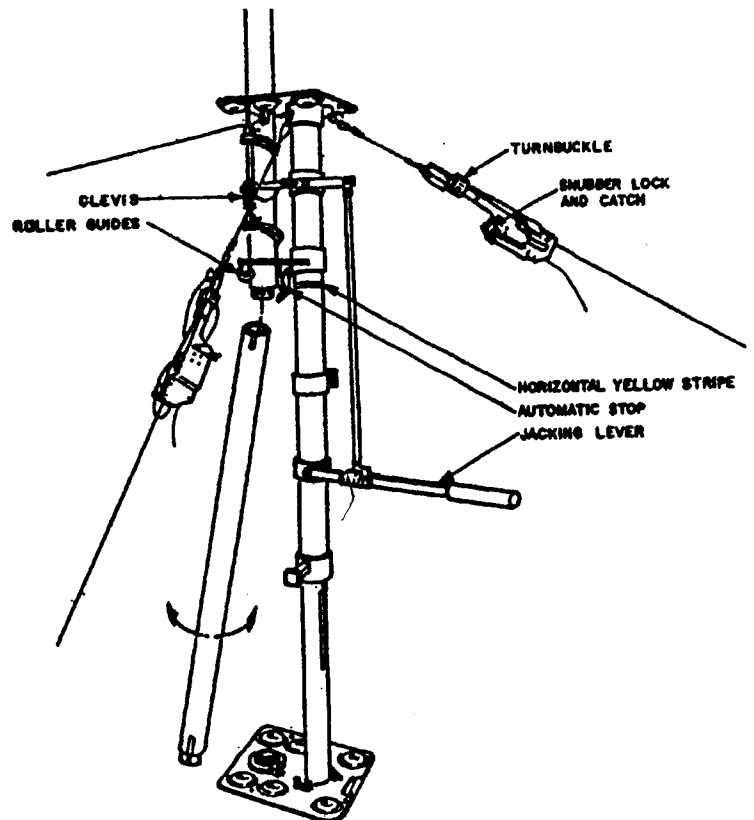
depicts the AB-952 Mast sections and elevator package both contained and in the initial assembly stage. The container becomes the mast elevator after removal of the outer mast sections with the center mast section in place for initial deployment.
